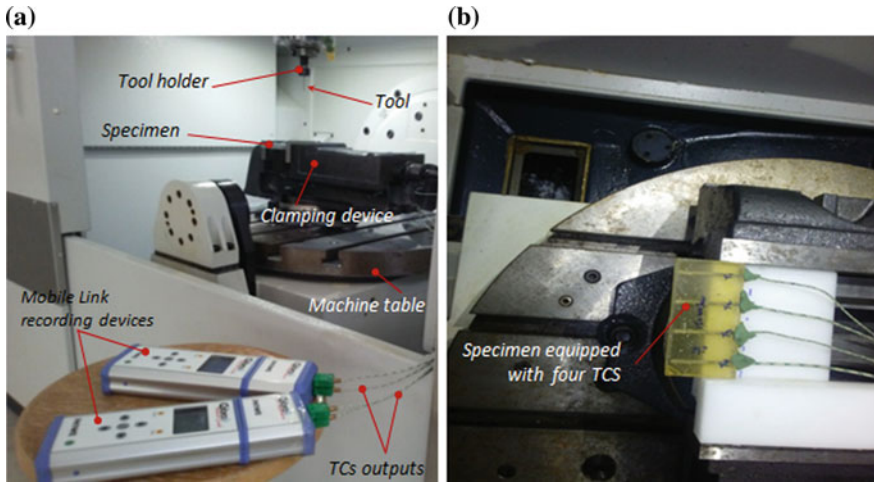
Experimental set-up. a Details of the testing device, and b enlarged view of the specimen equipped with the TCs
